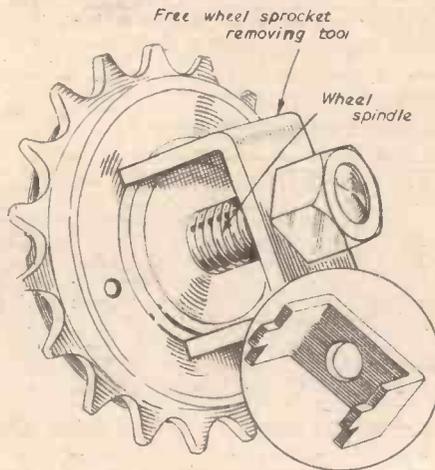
Freewheel removal tool (inset) and how it is used.
